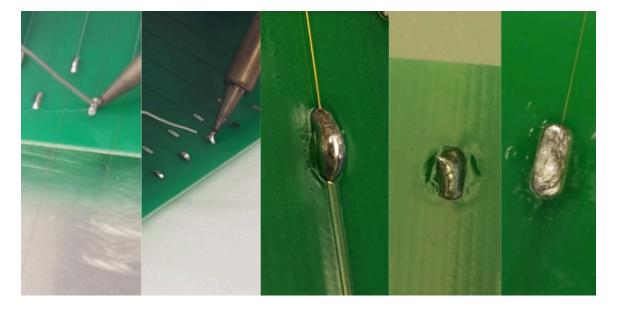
The soldering technique as well a successful joint, a spikey joint, and a dull joint that has been re-melted too many times. Notice the tail being pulled in the second image.
